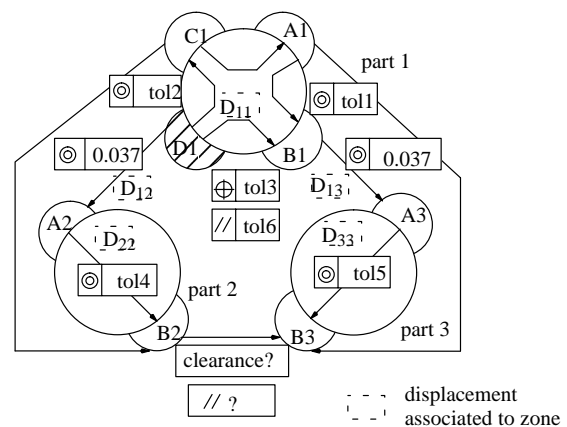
The assembly graph with both the inter-piece contacts and the inner piece TTRS symbolized as tolerances and displacements (slightly adapted from [Rivière 94]).
